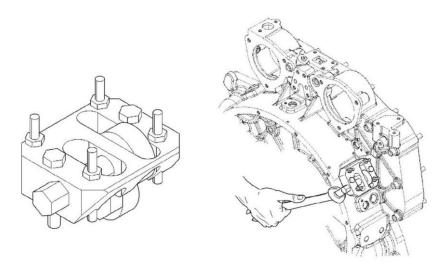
Turning device - Flywheel housing attachment special tool no. 30
